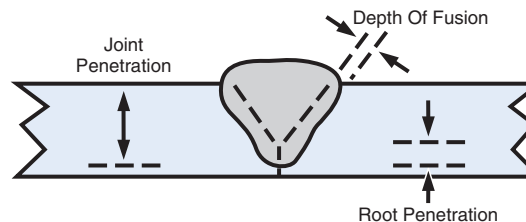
Depth of fusion and types of penetration. Complete joint penetration refers to weld metal that extends completely through the groove and has complete fusion into the base metal. What is shown is a partial joint penetration, which if not intended is referred to as incomplete joint penetration.
